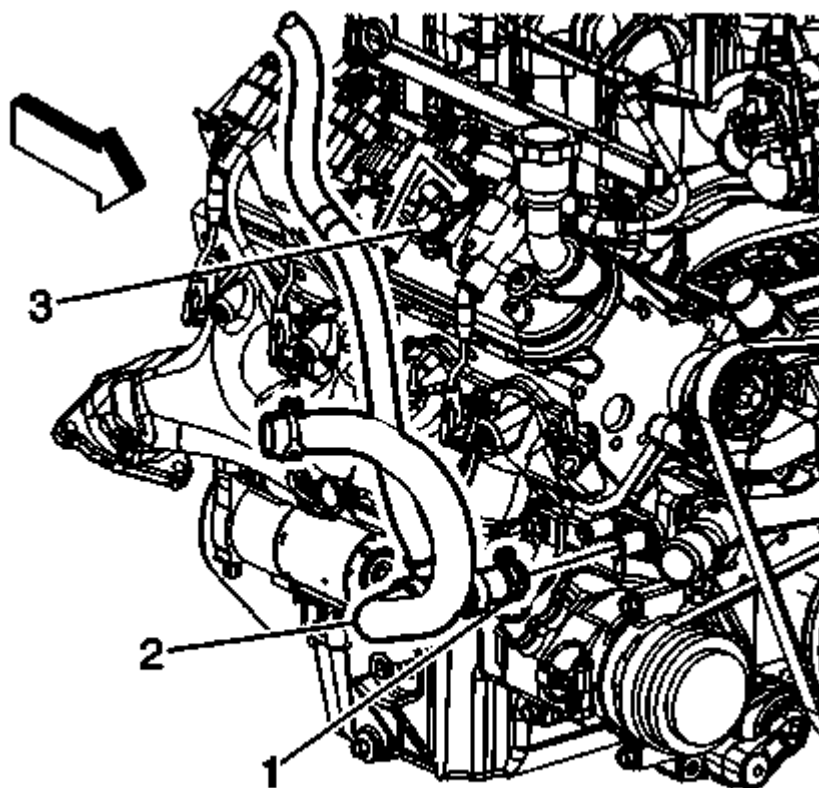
View Of Generator Battery Jumper Cable & Components
